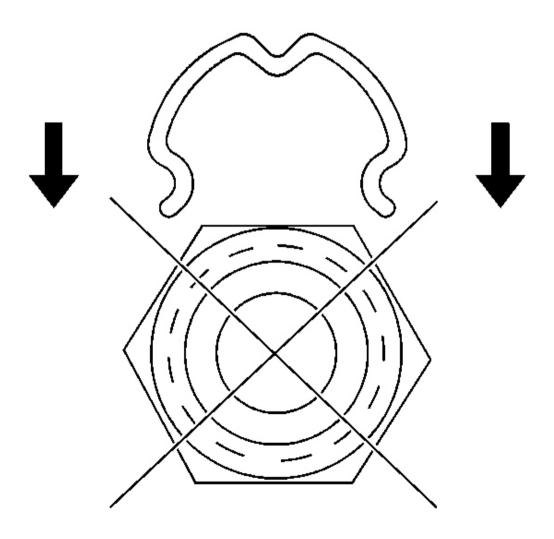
Do Not Install Retaining Ring In This Manner Courtesy of GENERAL MOTORS CORP.
